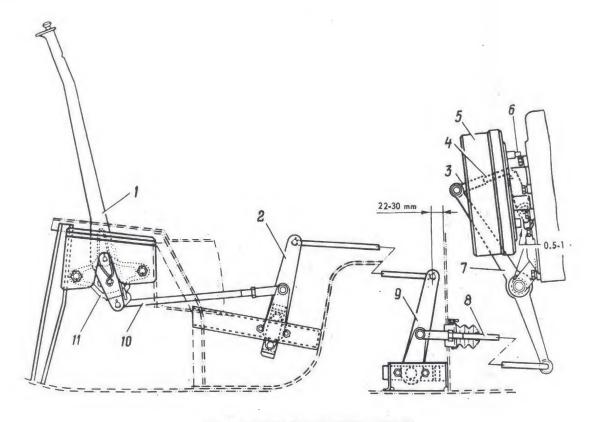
PARKING BRAKE CONTROL LINKAGE
